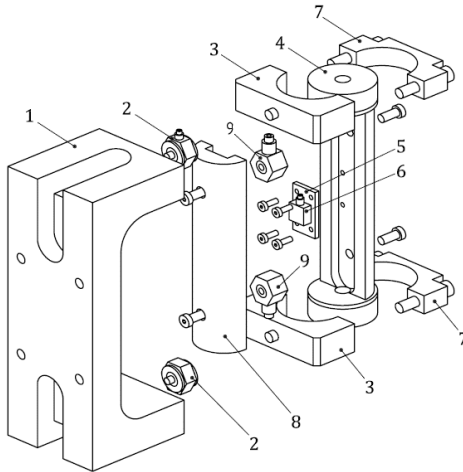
Assembly drawing from ISO 10819 of the cylindrical measuring handle. Key: 1 base aluminium, 2 feed force transducer, 3 rear bracket, 4 handle \varnothing 40mm, 5 accelerometer base, 6 accelerometer, 7 front bracket, 8 handle cover \varnothing 40mm, 9 grip force transducer (ISO - International Organization for Standardization, 2013).
